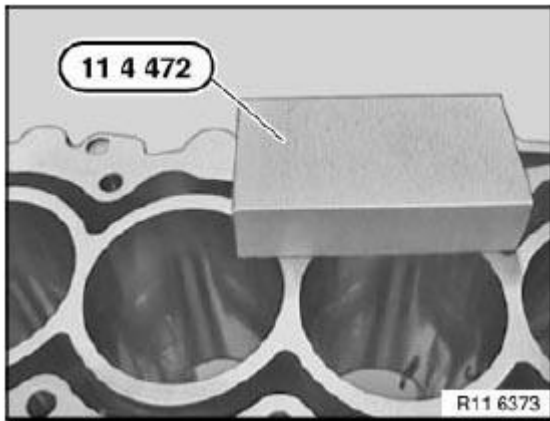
Removing Fine Residues On Sealing Surfaces Using Special Tool 11 4 472
